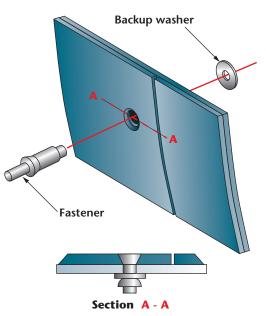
An oversize fastener installed with a backup washer to prevent delamination at the edges of the fastener hole.
